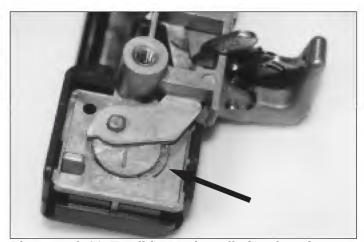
The glove box lock is held in place by two phillips-head screws. Remove the screws and slide out the lock assembly.
